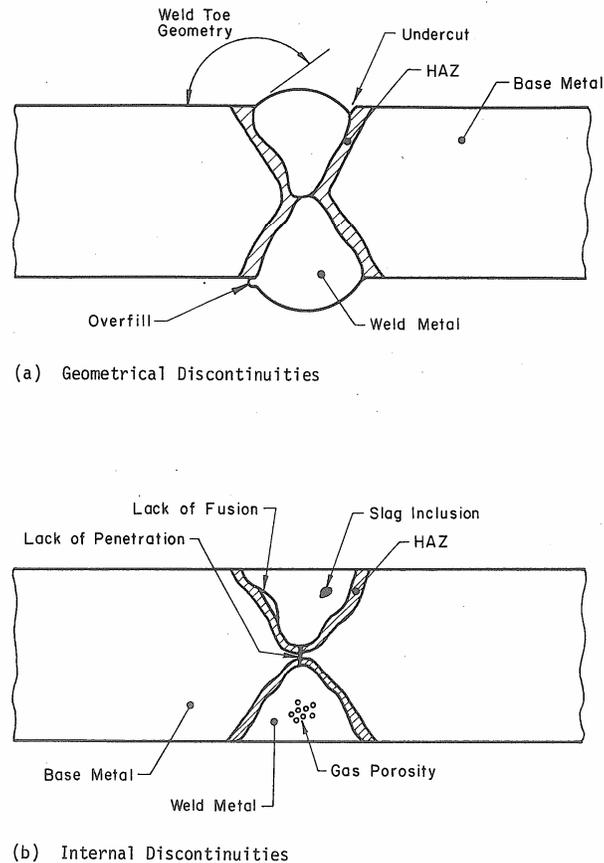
Common Geometrical and Internal Weld Discontinuities
